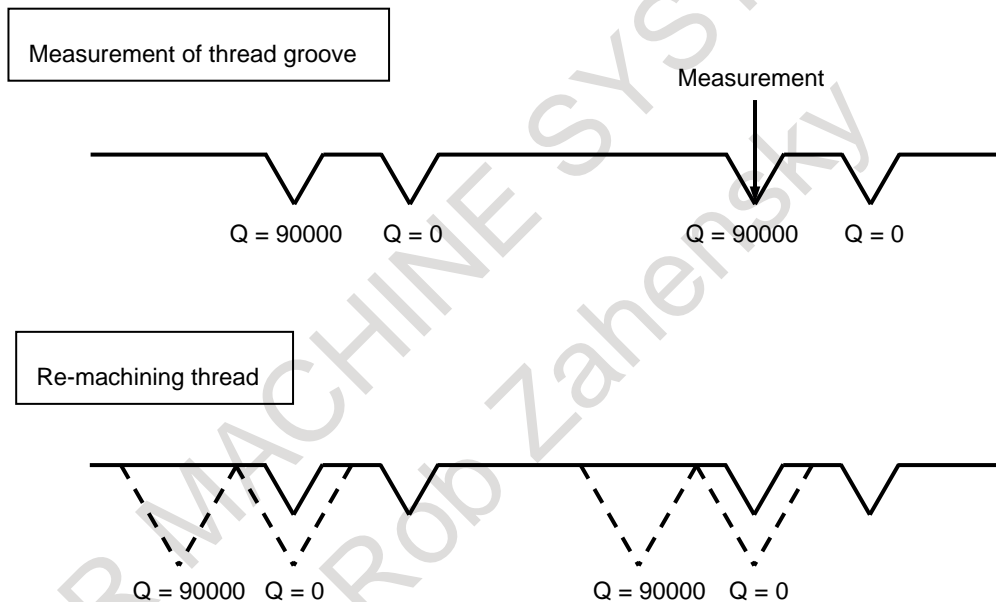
(b) Example of re-machining thread in bit 0 (ADQ) of parameter No.11486 is set to 1.
